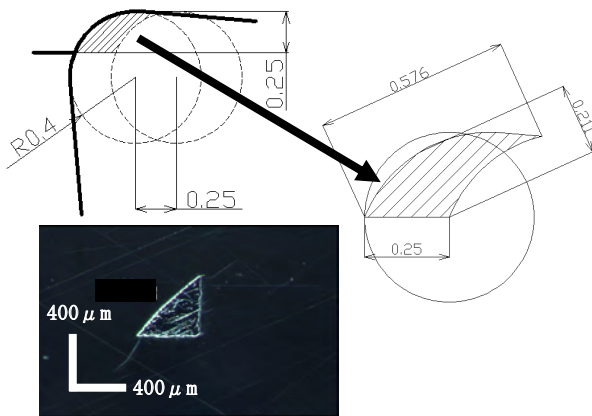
Cutting cross-section when cutting by a round corner of the cutting edge
